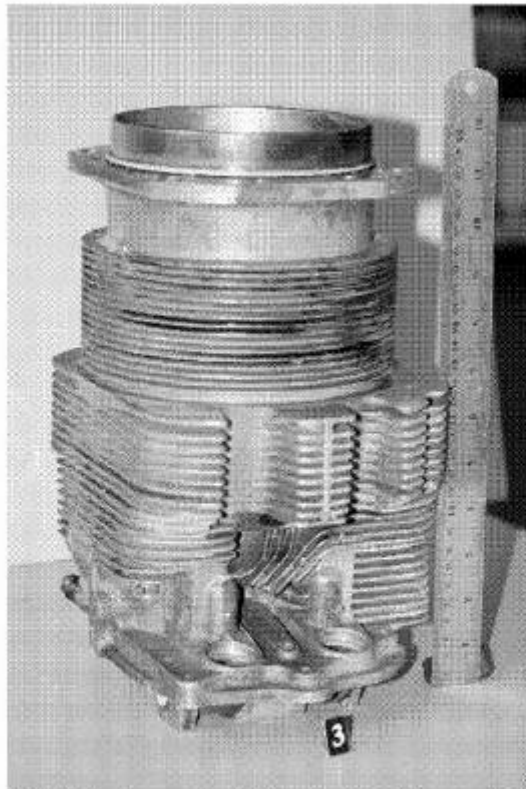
Cylinder assembly: Cylinder head is at lower position of the picture
